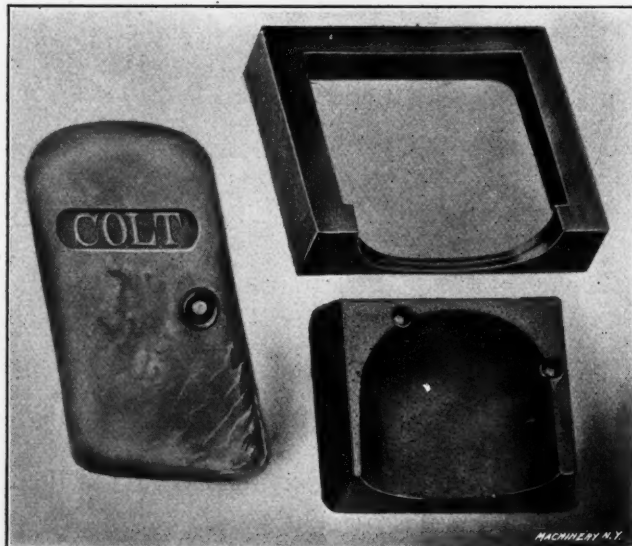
Engraved Pearl Handle, Mold and Wax Former Produced in Mold
